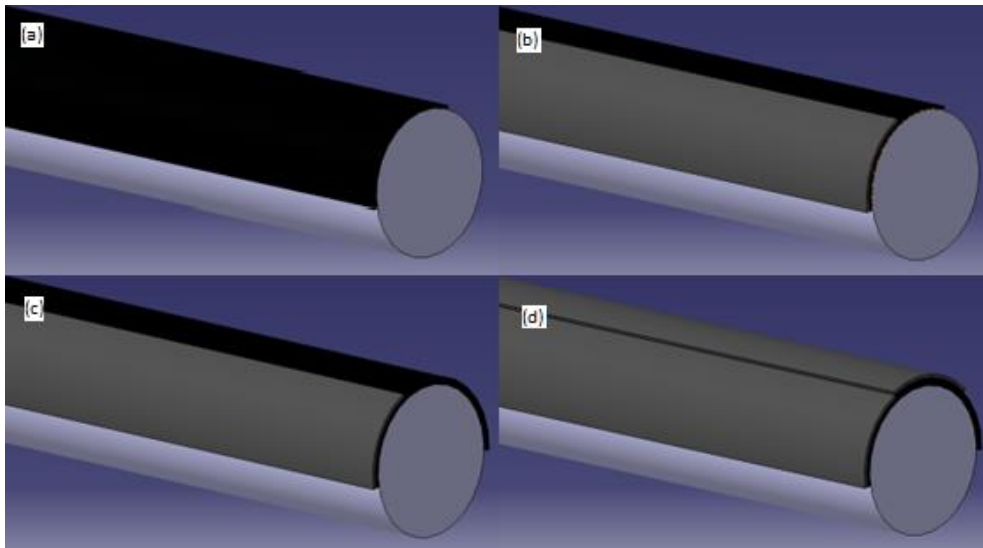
CF tows and CNT sheets layup sequence: (a) CNT sheet on barrel (b) CF tow lined up on one side of the first CNT sheet (c) second CNT sheet next to the first CF tow (d) CF tow placed on top of second CNT sheet next to first CF tow. Sequence repeated for 5 tows and CNT sheet to create the first layer.
